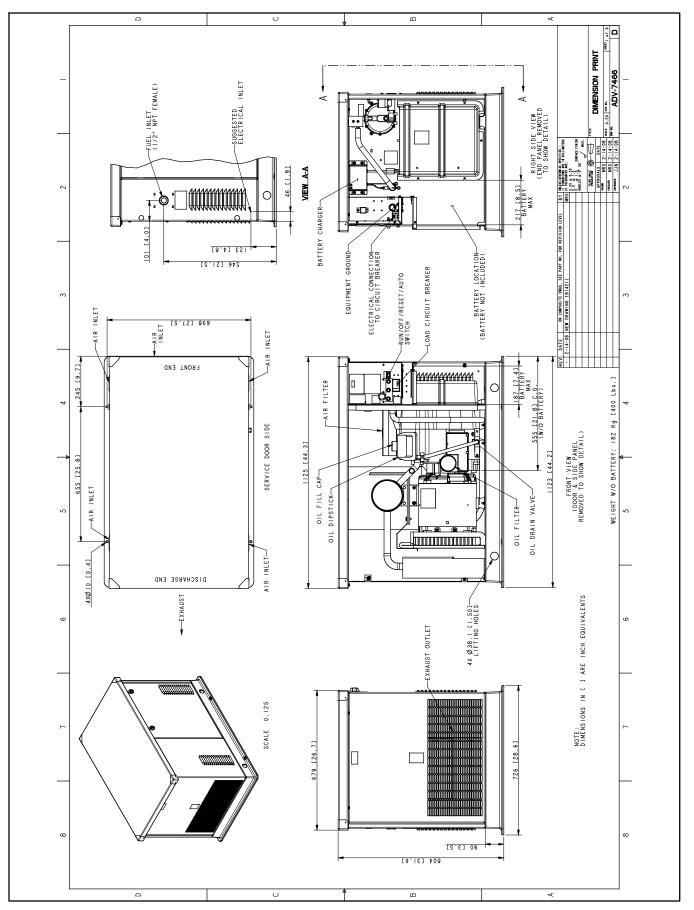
Generator Set Mounting Details and Dimensions, 12TRES (3-phase), ADV-7466, Sheet 1
